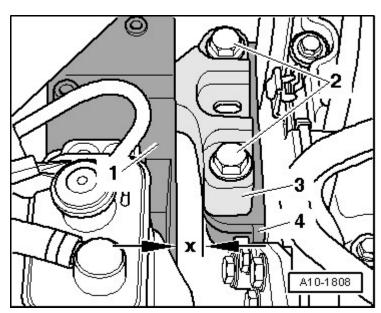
Checking Dimensions At Engine/Transmission Assembly Mounting Courtesy of AUDI OF AMERICA, LLC
